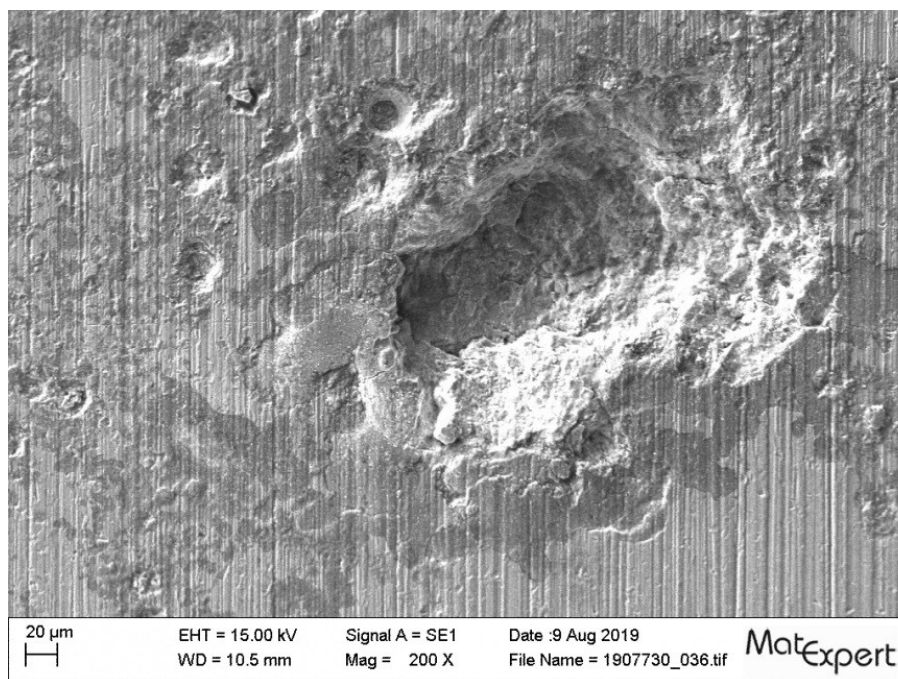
Ball bearing from the centre engine, inner-race bearing track – corrosion.
